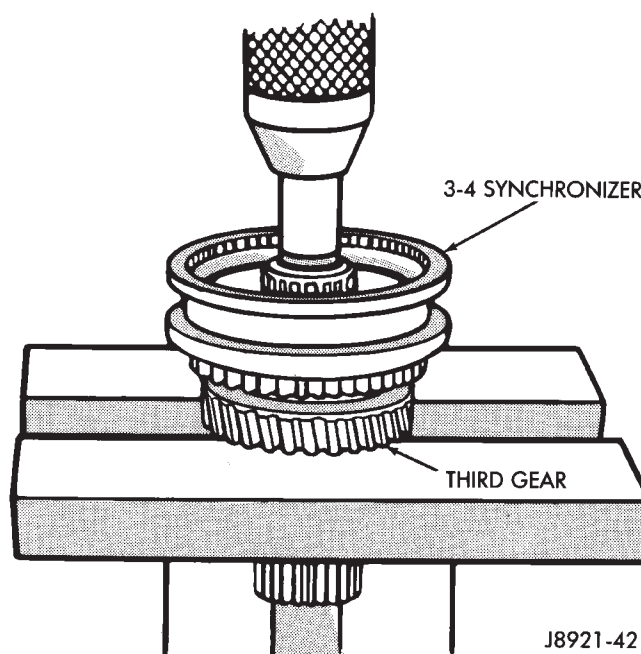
Removing 3-4 Synchronizer And Third Gear
